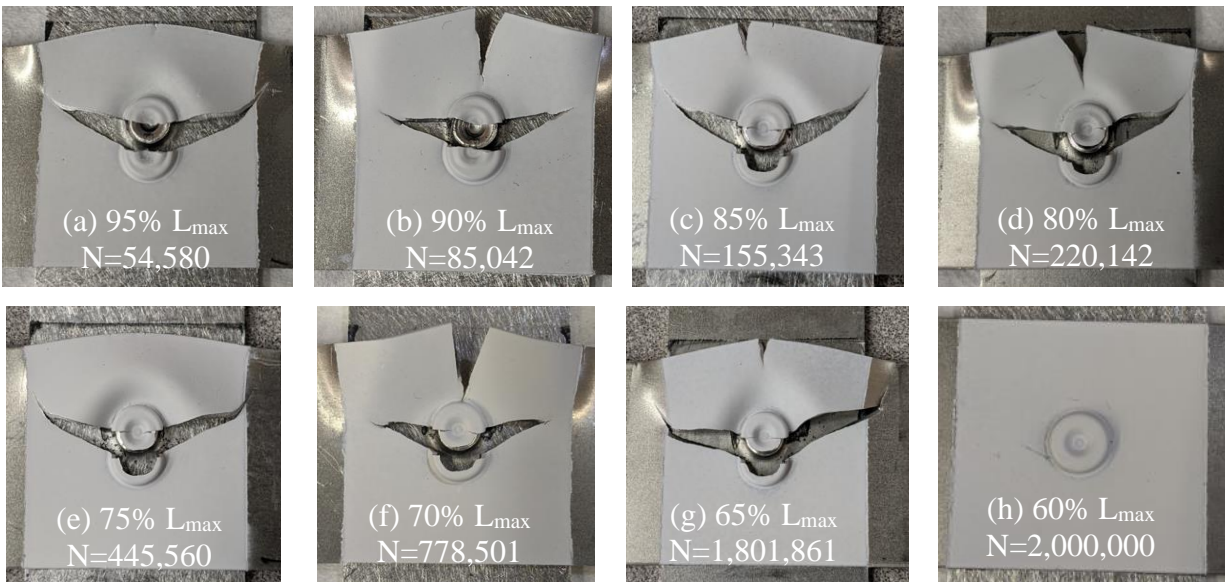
Al 6016 2mm by 1mm SPR cross-tension post fatigue test 90° clenched sheet damage at varying load levels and undamaged runout (h)
